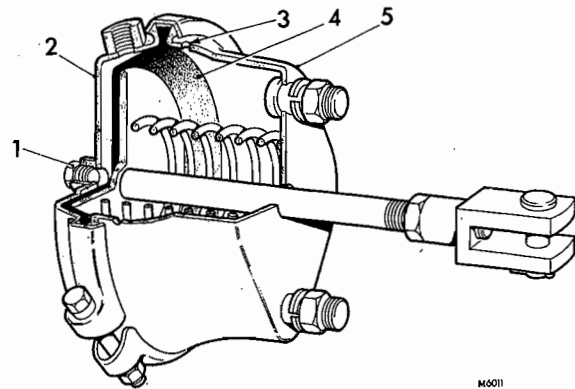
CUT-AWAY VIEW OF DIAPHRAGM BRAKE CHAMBER
